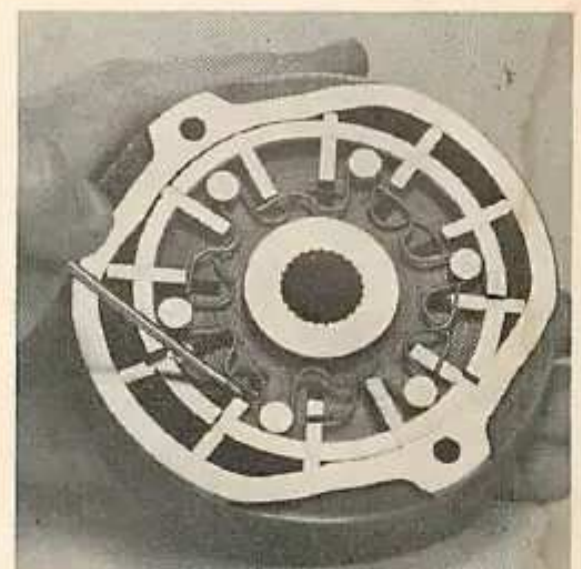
Pin in actuator sleeve must be engaged in hole in end of spool valve before actuator assembly is installed. If spool can-
